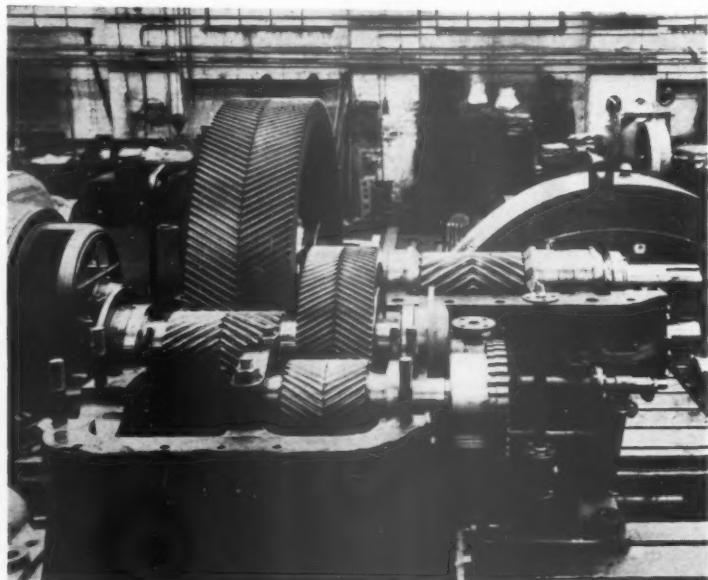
Typical examples of planed helical gears in double reduction rolling mill drive.
